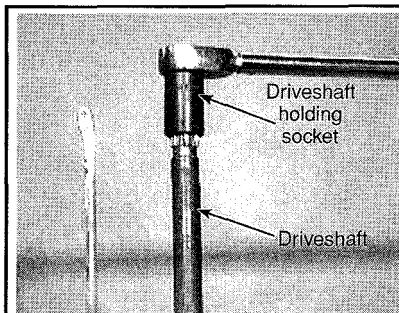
Use a special driveshaft socket to turn the driveshaft...
